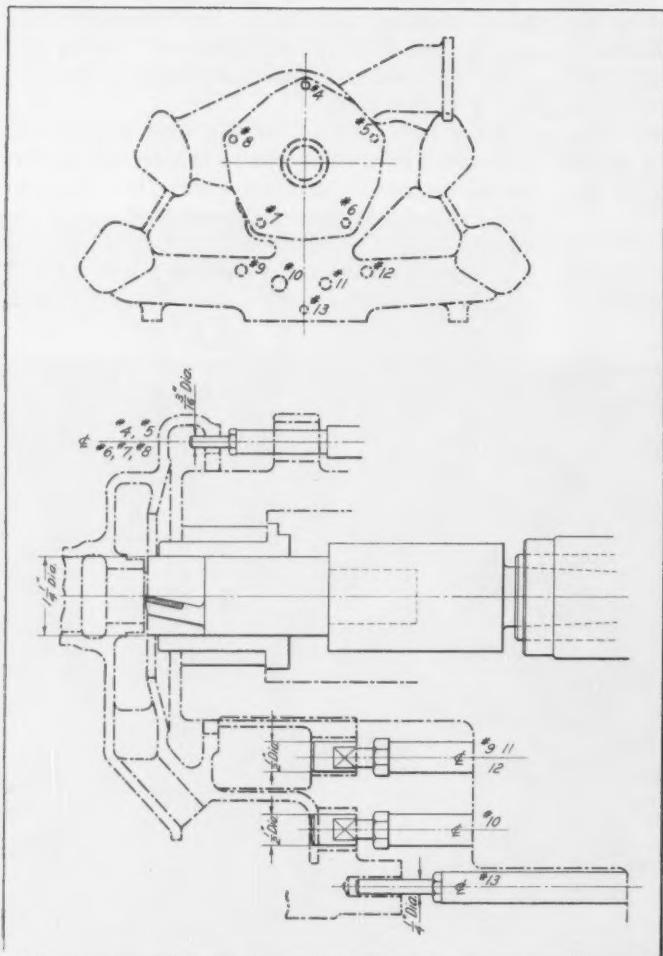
At the eleventh station of the transfer machine, hydraulically operated probing pins check ten previously drilled holes in preparation for subsequent tapping.
